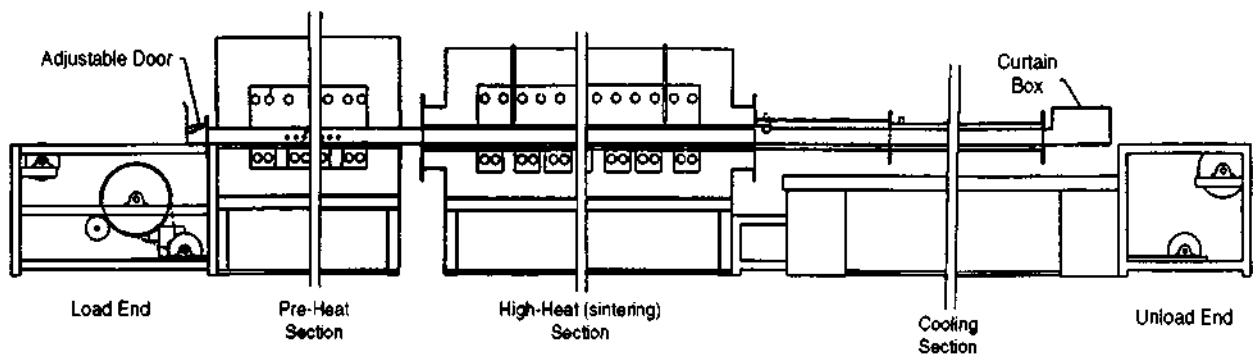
L1d Conveyorized, continuous-type, sintering furnace for powder metal parts. The furnace includes a preheat section, a high-heat sintering section and a cooling section. (Note: The lengths of the sections are considerably longer than shown here. The drawing was shortened to fit the page.) (Drawing courtesy Abbott Furnace Co.)
